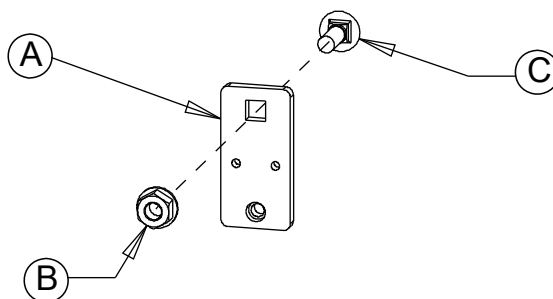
Attach the Bottom Housing and Bottom Cover
